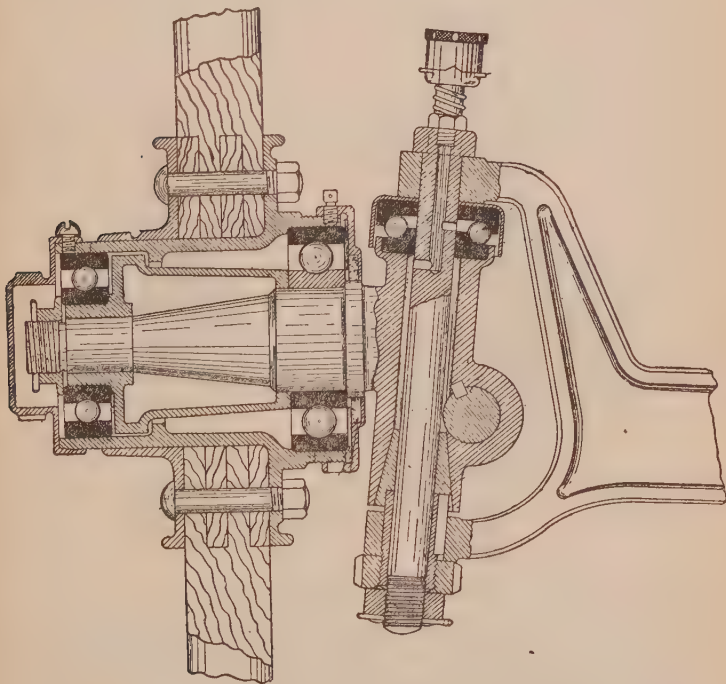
Front swivel axle of the Chadwick automobile; view showing the ball bearing. It will be noted that the steering axle bolt is not at right angles with the wheel axle. It is designed this way in order that shocks shall not be transmitted through the wheels to the gear, but will be absorbed in the axles.
